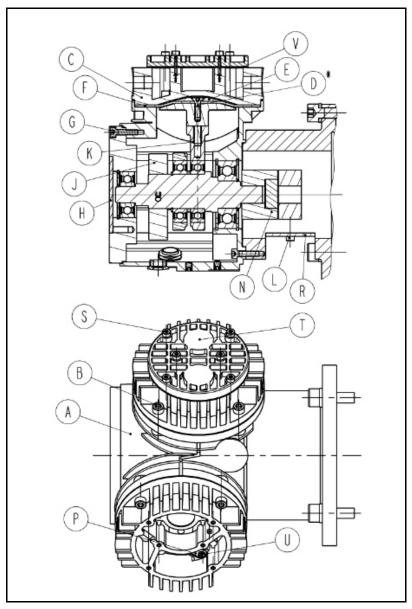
Pump parts for double-head versions with aluminium head *not for .9 versions
